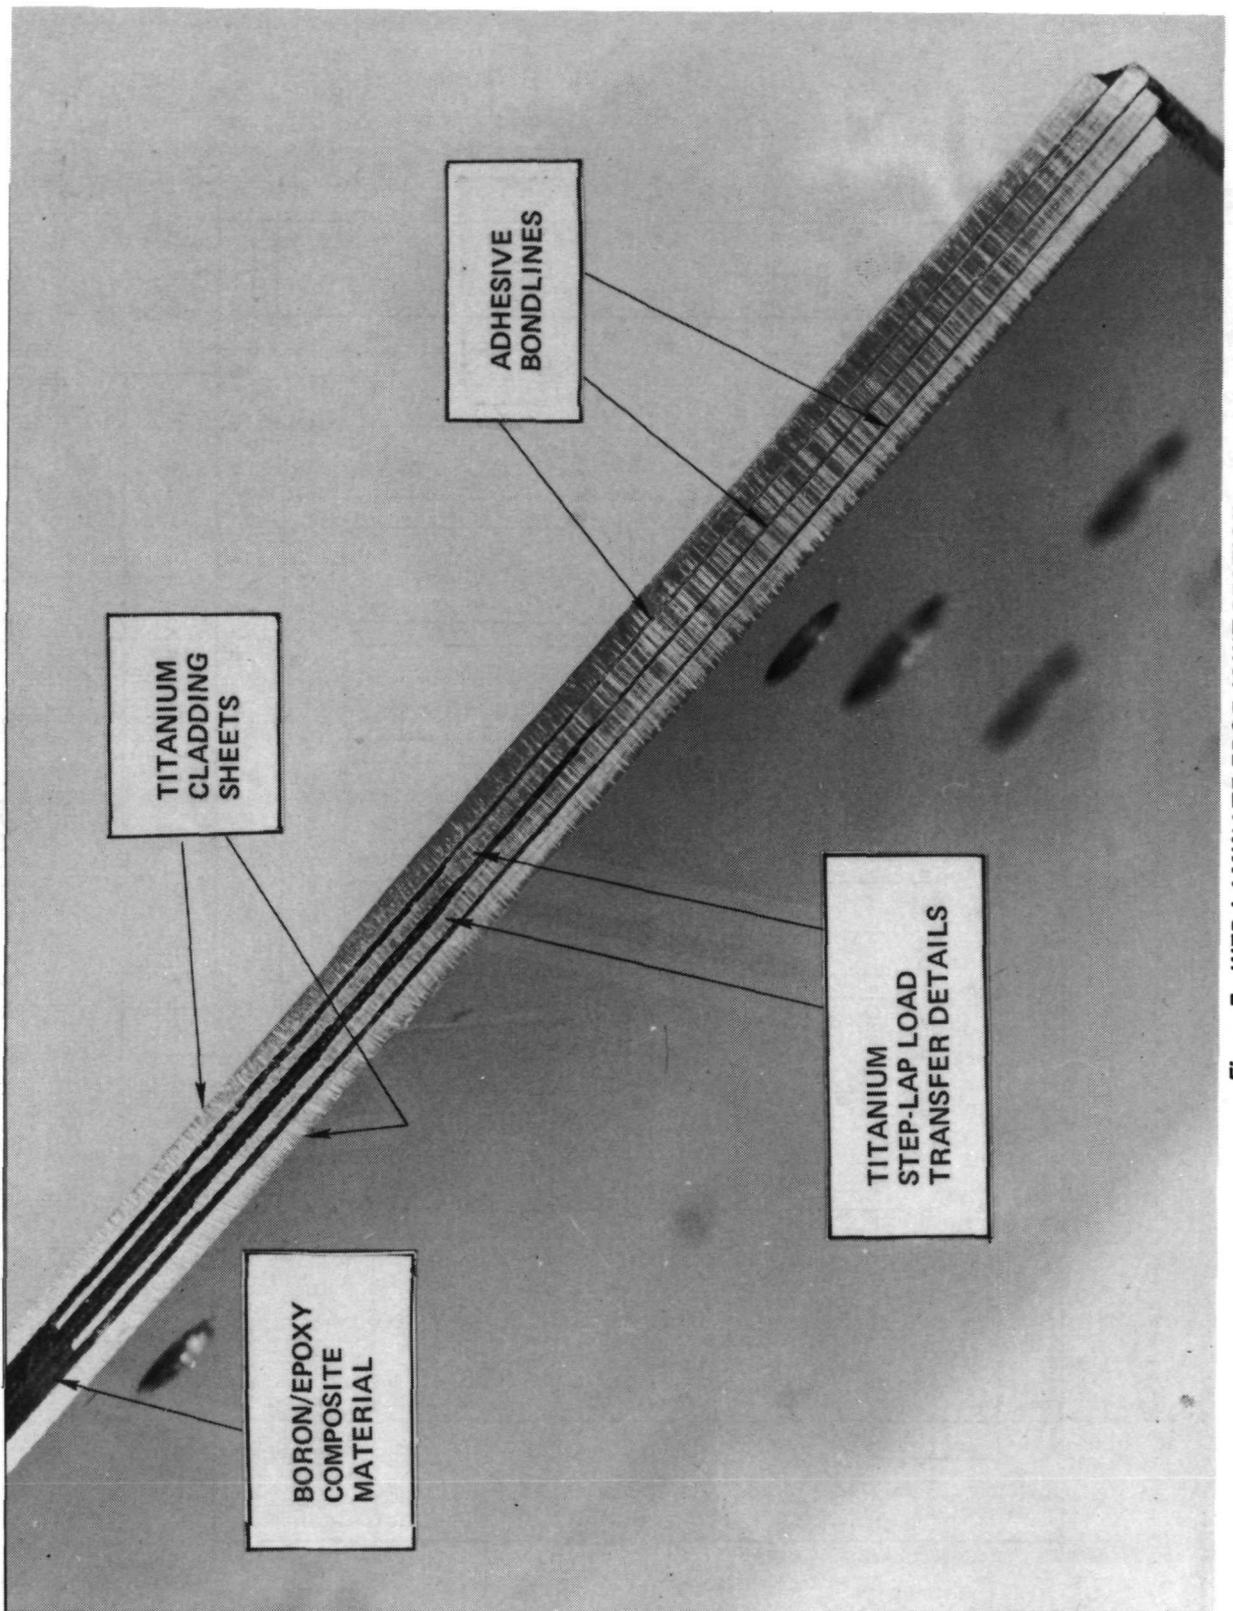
WEB LAMINATE EDGE JOINT SECTION
